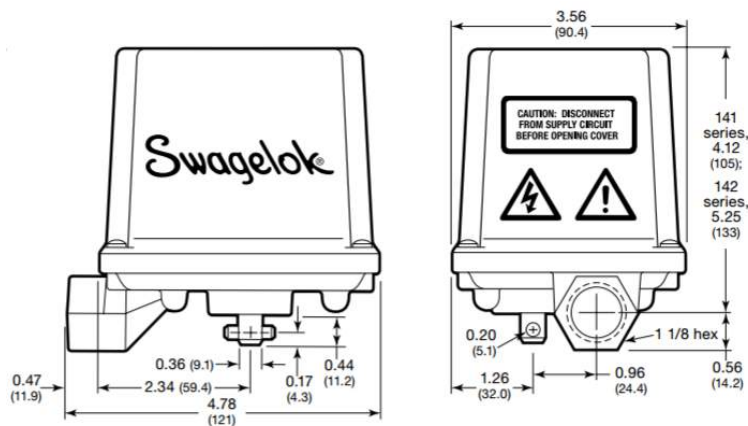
Dimensional diagram of valve and a Swagelok valve actuator [211].
